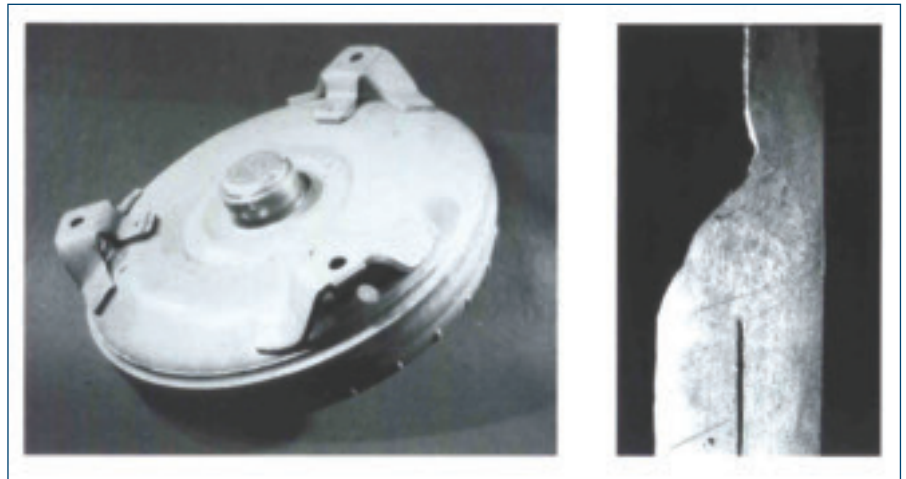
Nonvacuum EB welded torque converter.
